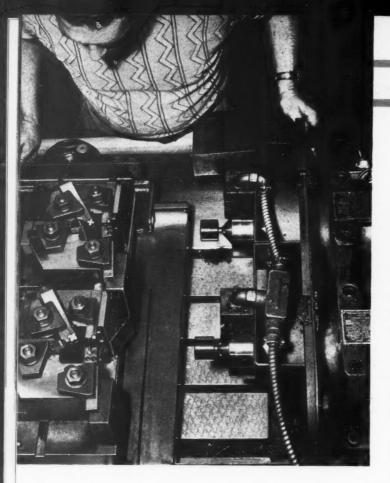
Oil-pump gear blanks are turned, faced on both sides, and chamfered at the rate of 190 per hour on a double-spindle machine
